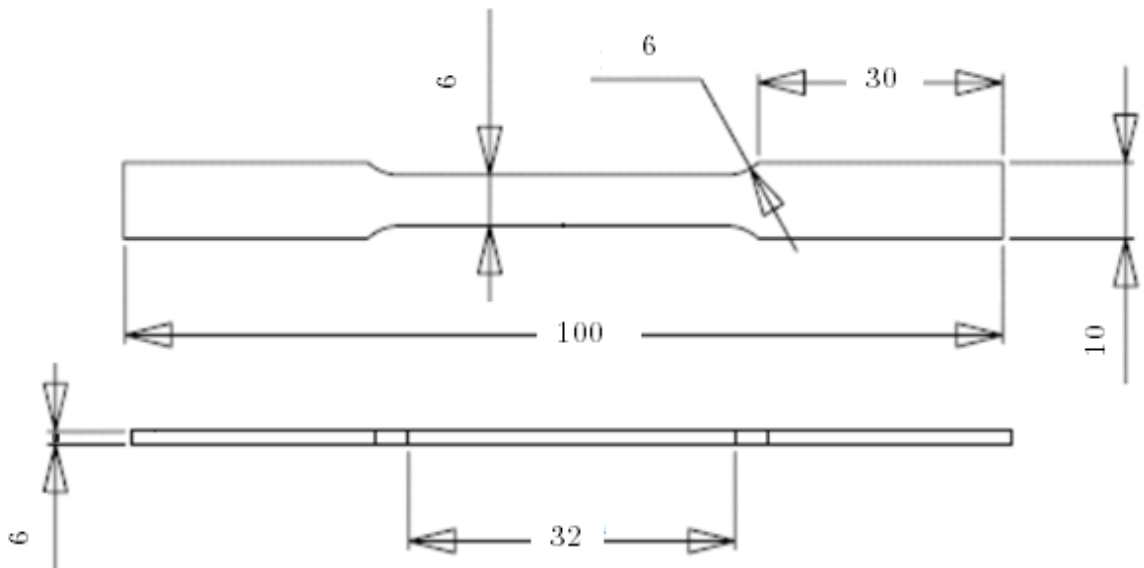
Schematic of tensile specimen (All dimensions are in mm)
